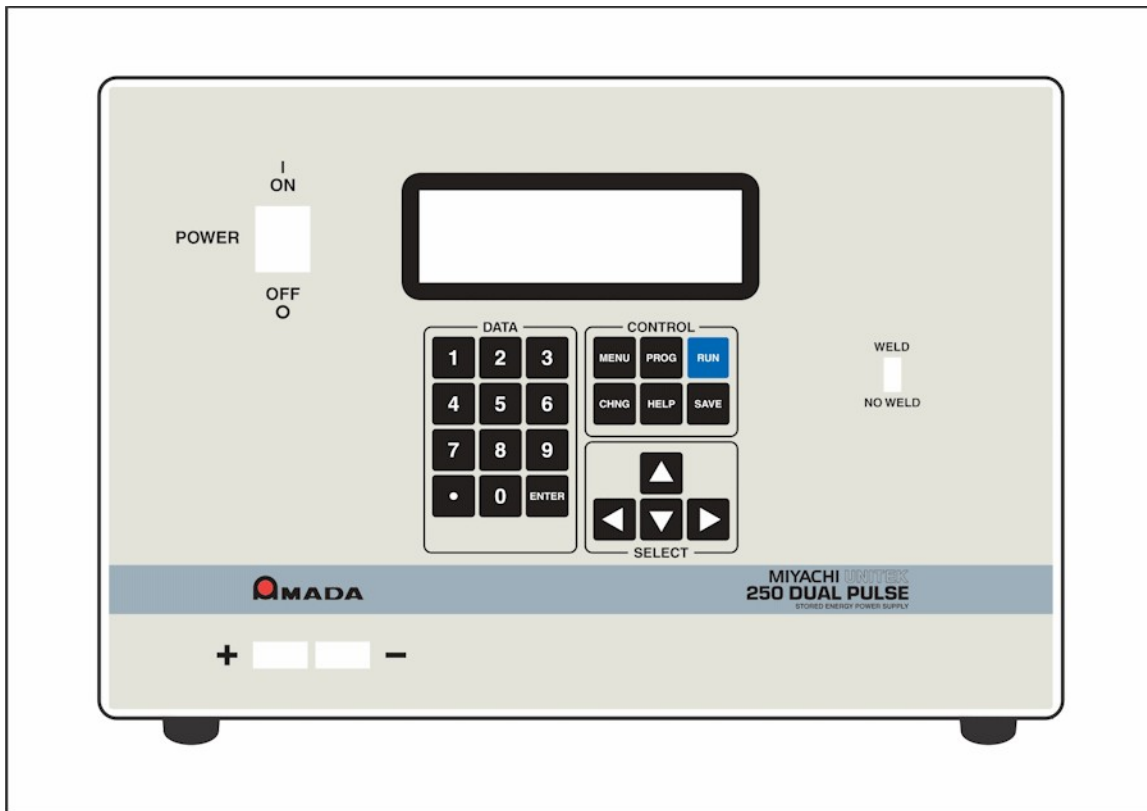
250DP Dual Pulse Resistance Welding Power Supply
